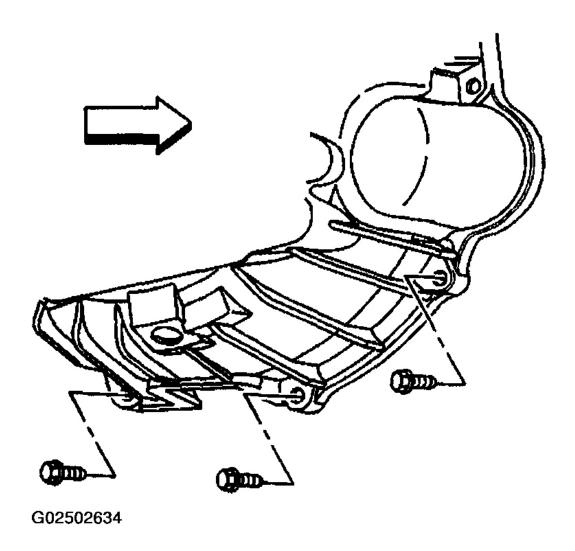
Removing Access Plugs For Rear Oil Pan Nuts Courtesy of GENERAL MOTORS CORP.
